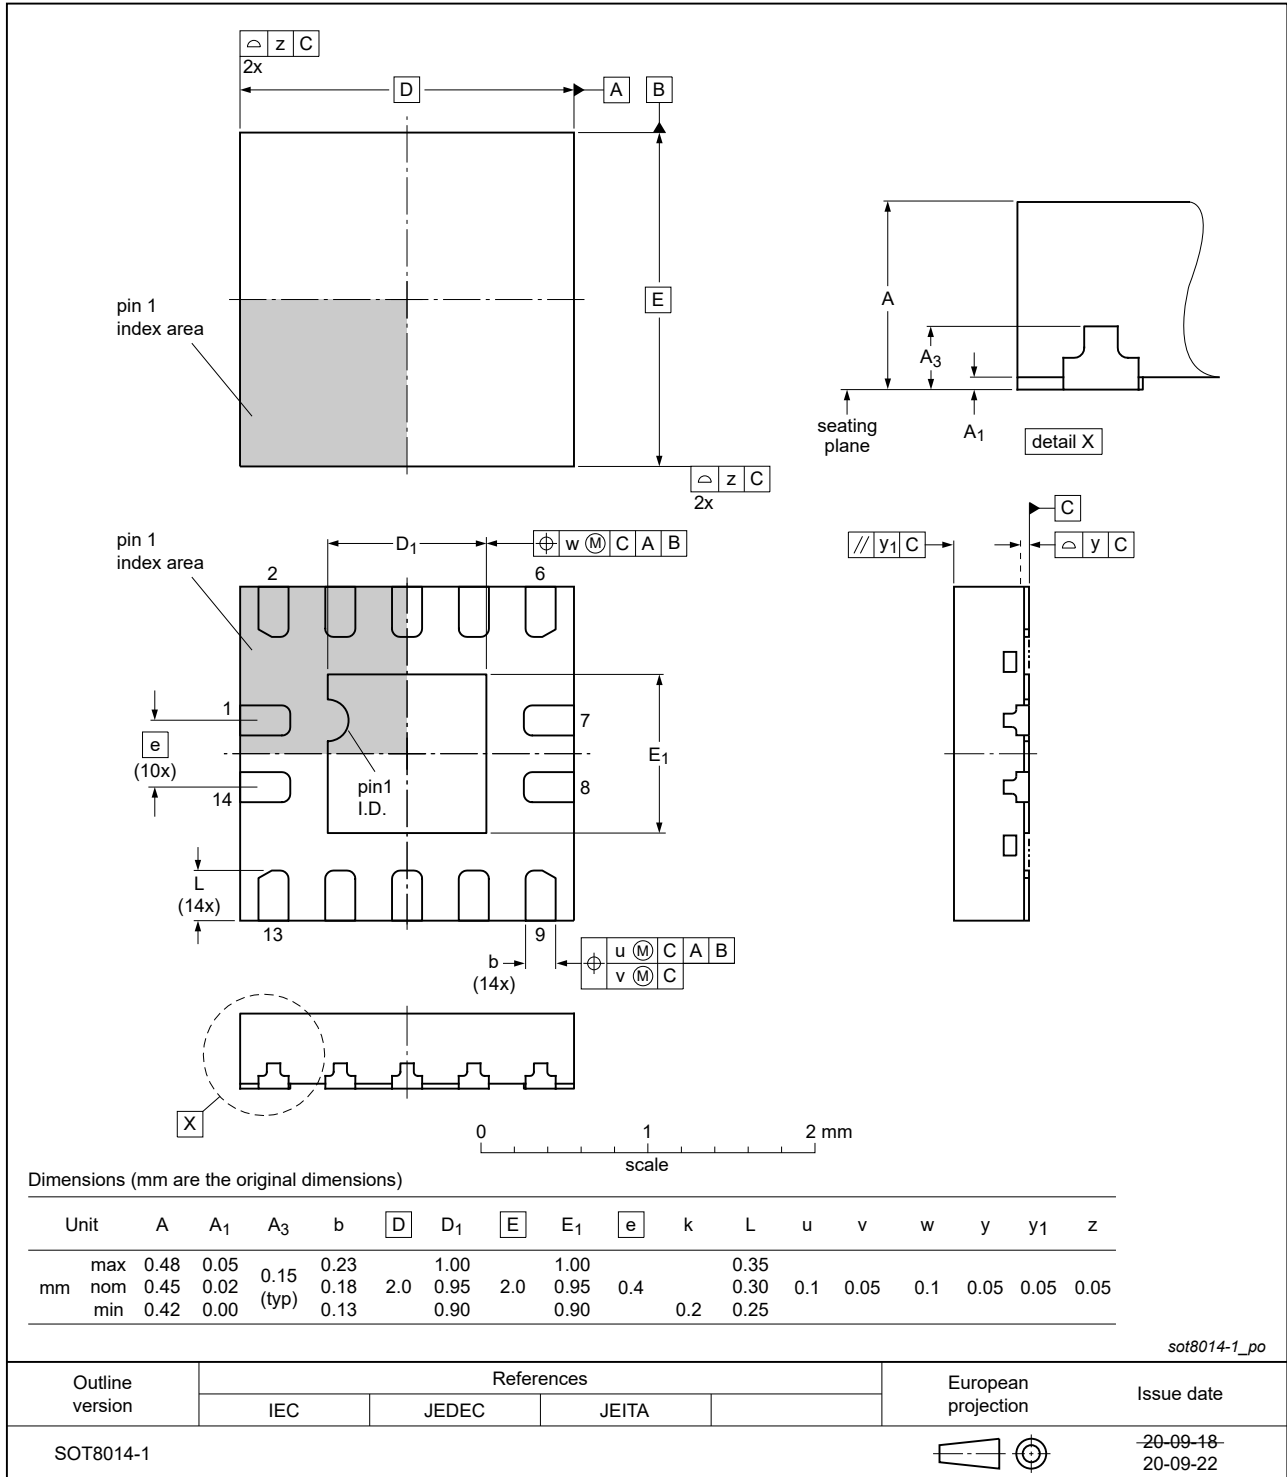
Package outline SOT8014-1 (DHXQFN14)
